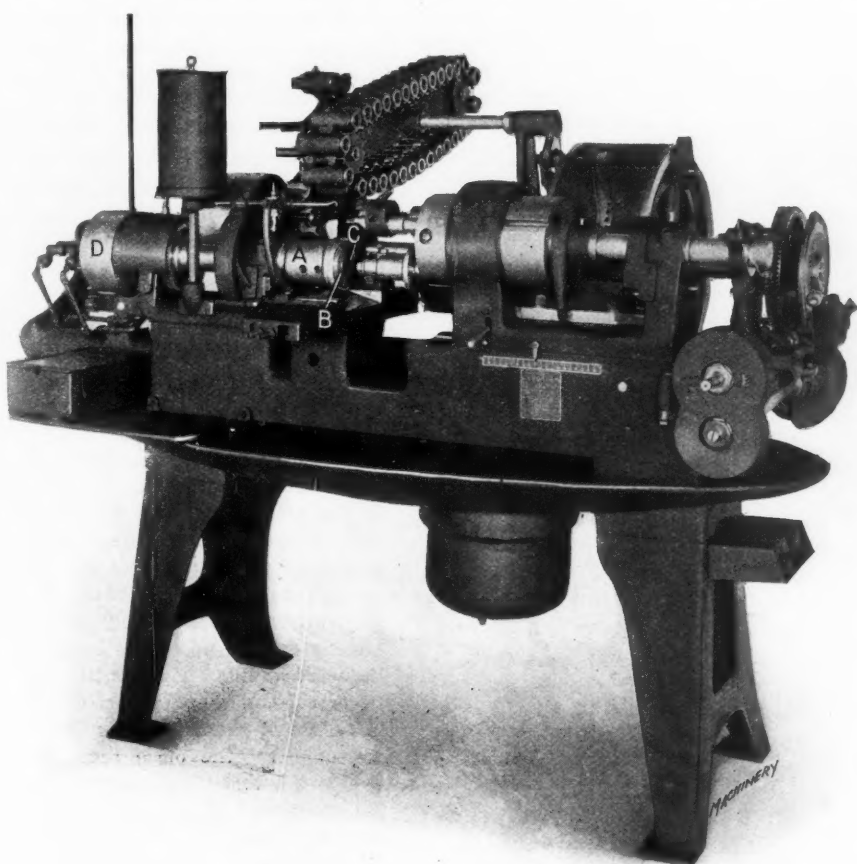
Front View of Cleveland Automatic for machining Brass Nuts
